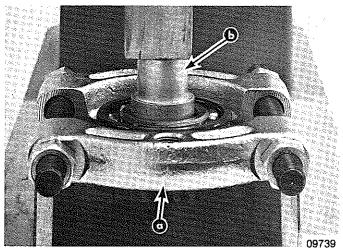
Removing Reverse Gear and Bearing from Bearing Carrier
